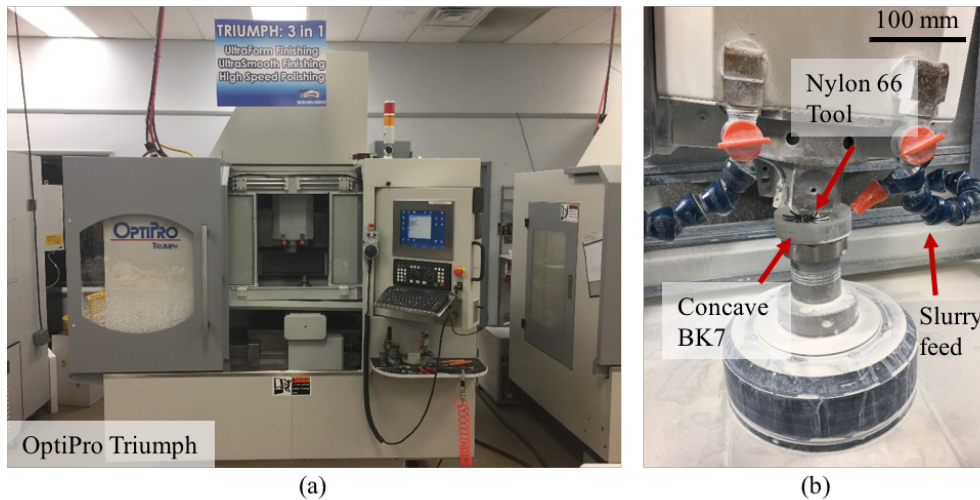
5-axis CNC setup (a) OptiPro Triumph machine (b) twelve fiber Nylon 6/6 tool engaged with concave workpiece
